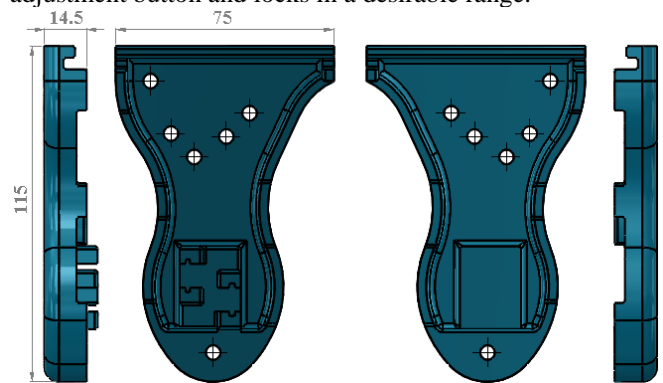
The rear (left) and front (right) part of the casing with dimensions in mm.
